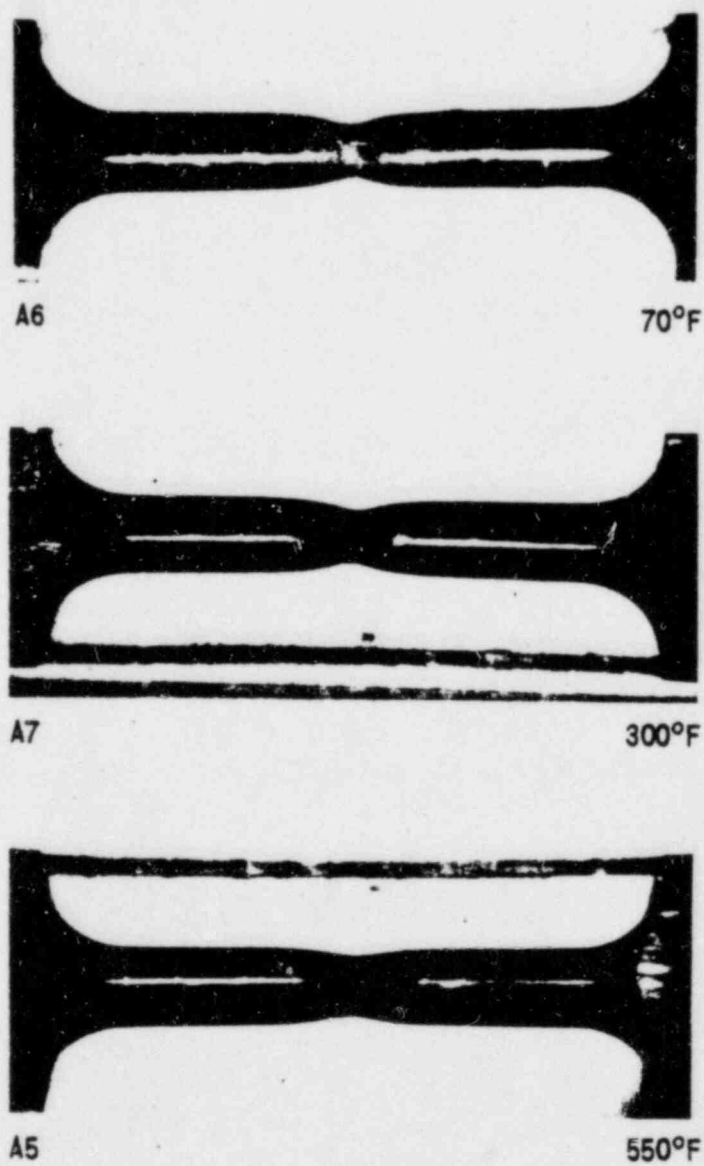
Fractured Tensile Specimens From Point Beach Unit No. 1 Pressure Vessel Shell Plate A9811
